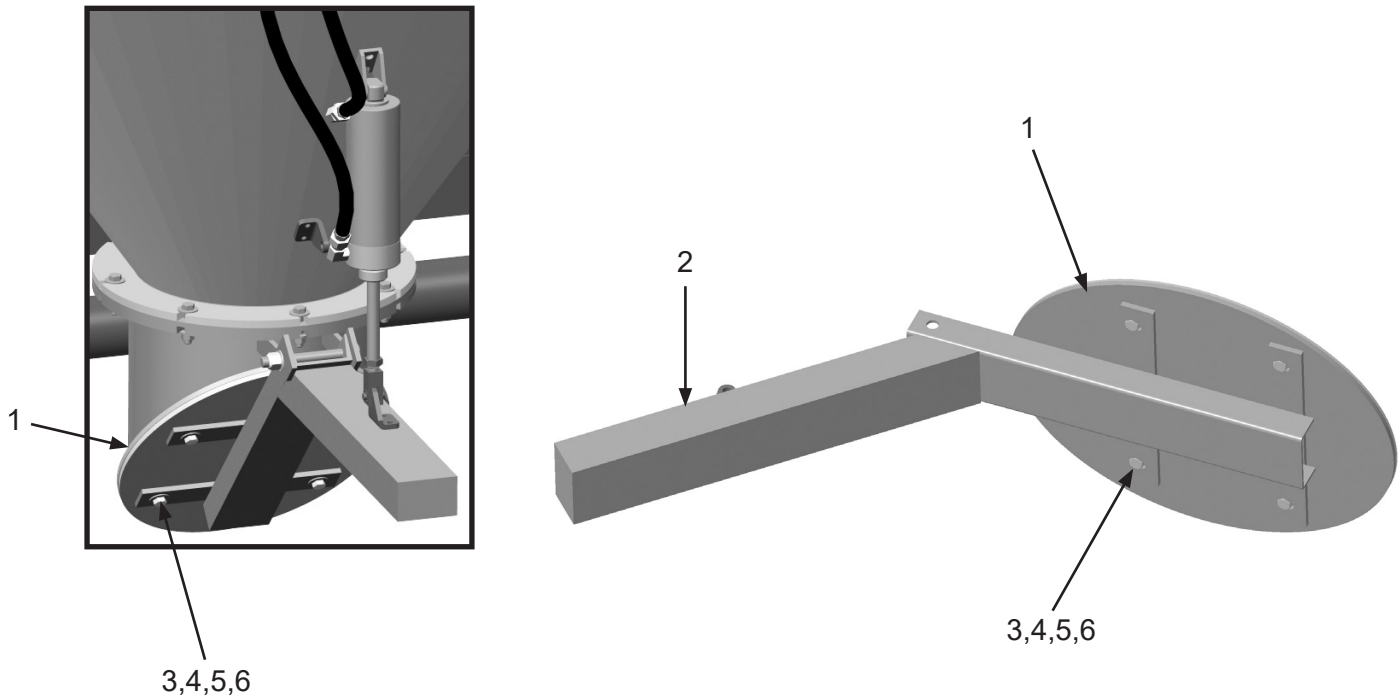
Dump Door Assembly (*Vacuums Manufactured After 7/1/2025*)
